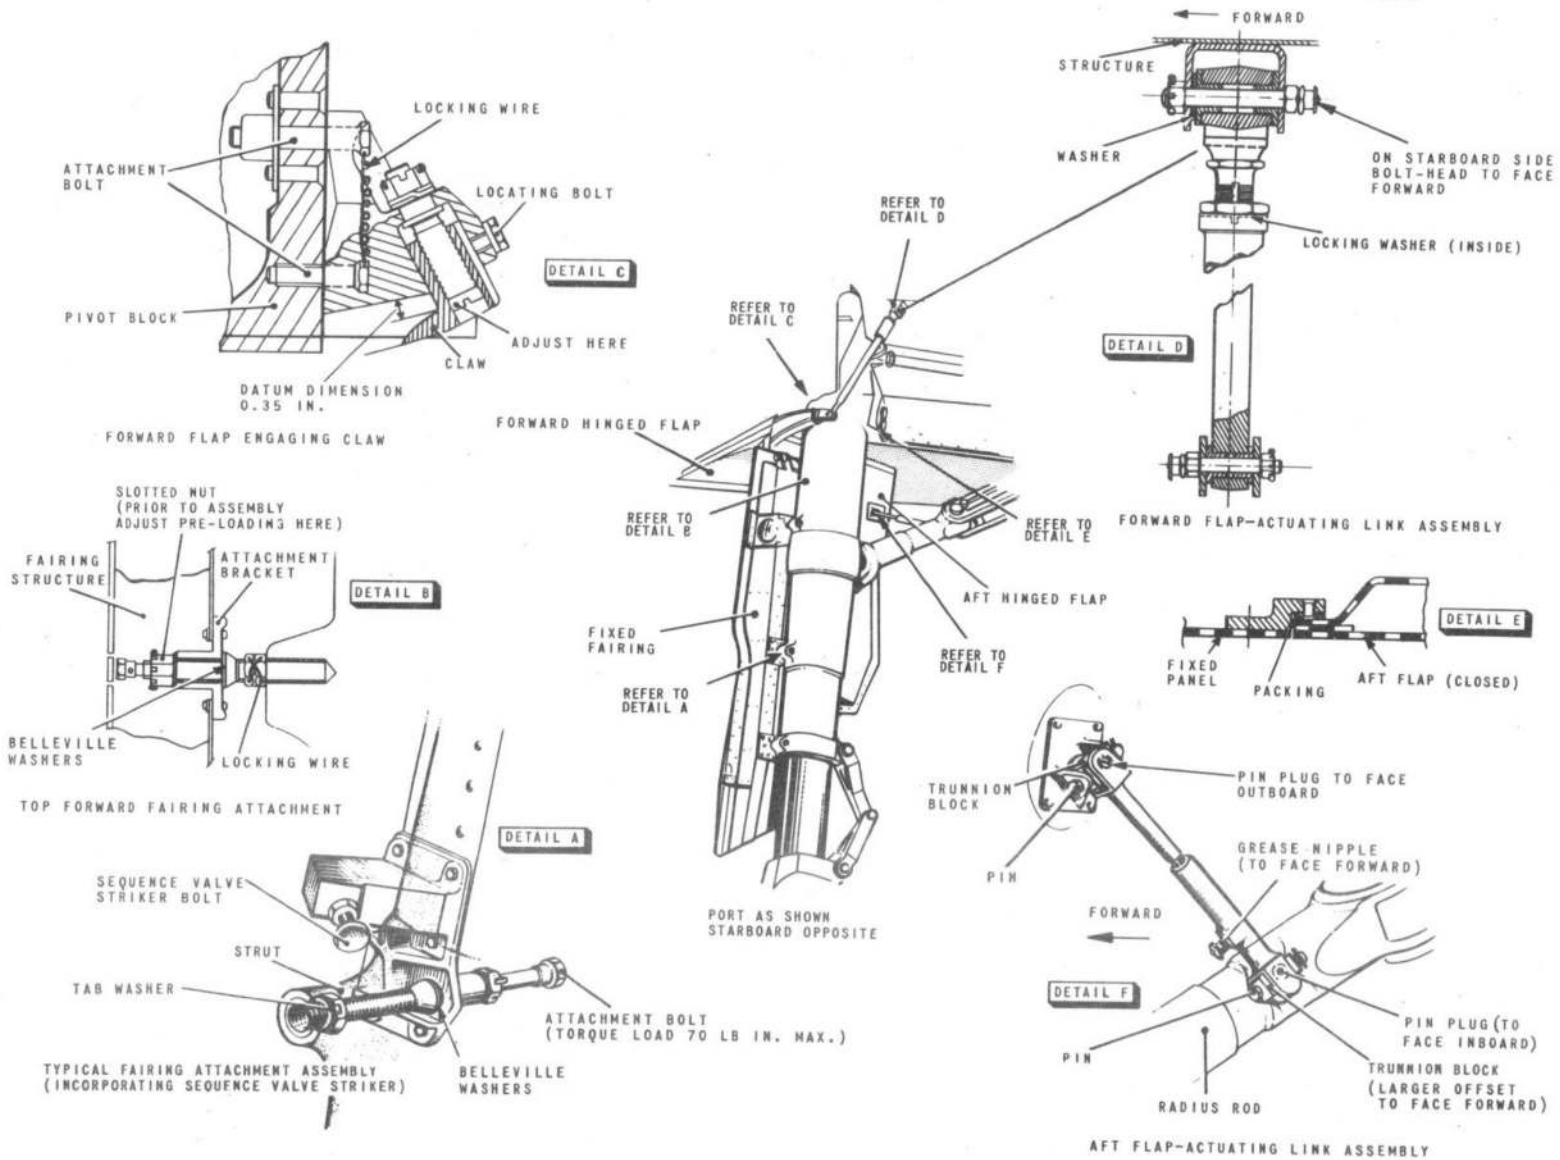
SHOCK-ABSORBER FAIRING-REMOVAL AND ASSEMBLY
